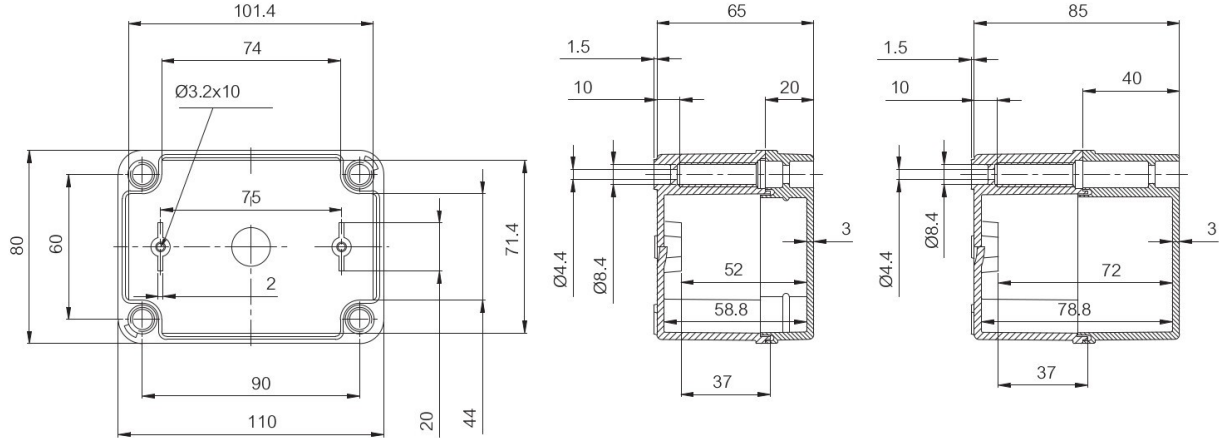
Housing dimensions (in mm). Note: Drawing not including cable gland and sensor.
